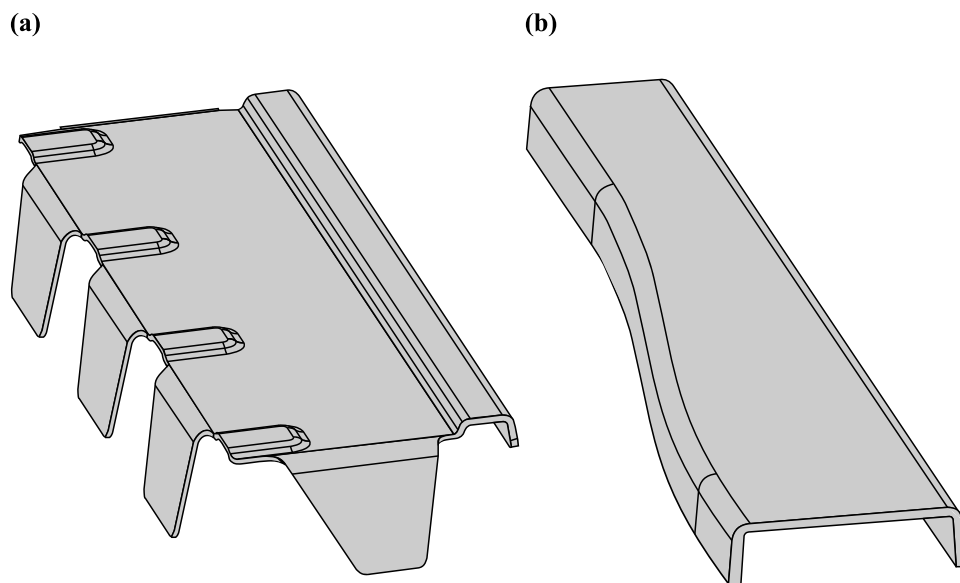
Demonstrator parts of follow-up research projects: (a) ZIM project ESKoRT; (b) ZIM FogeLRaP.
